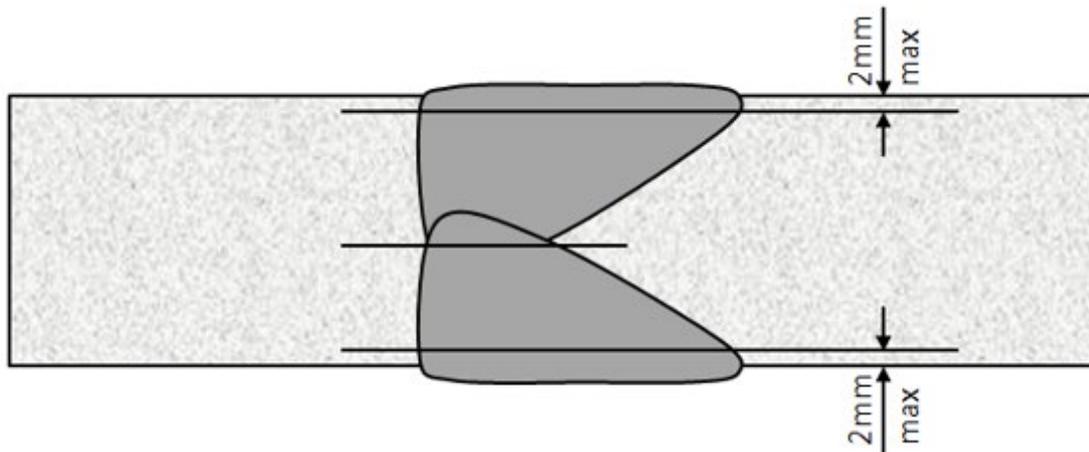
Examples of hardness test with rows of indentations in butt welds
